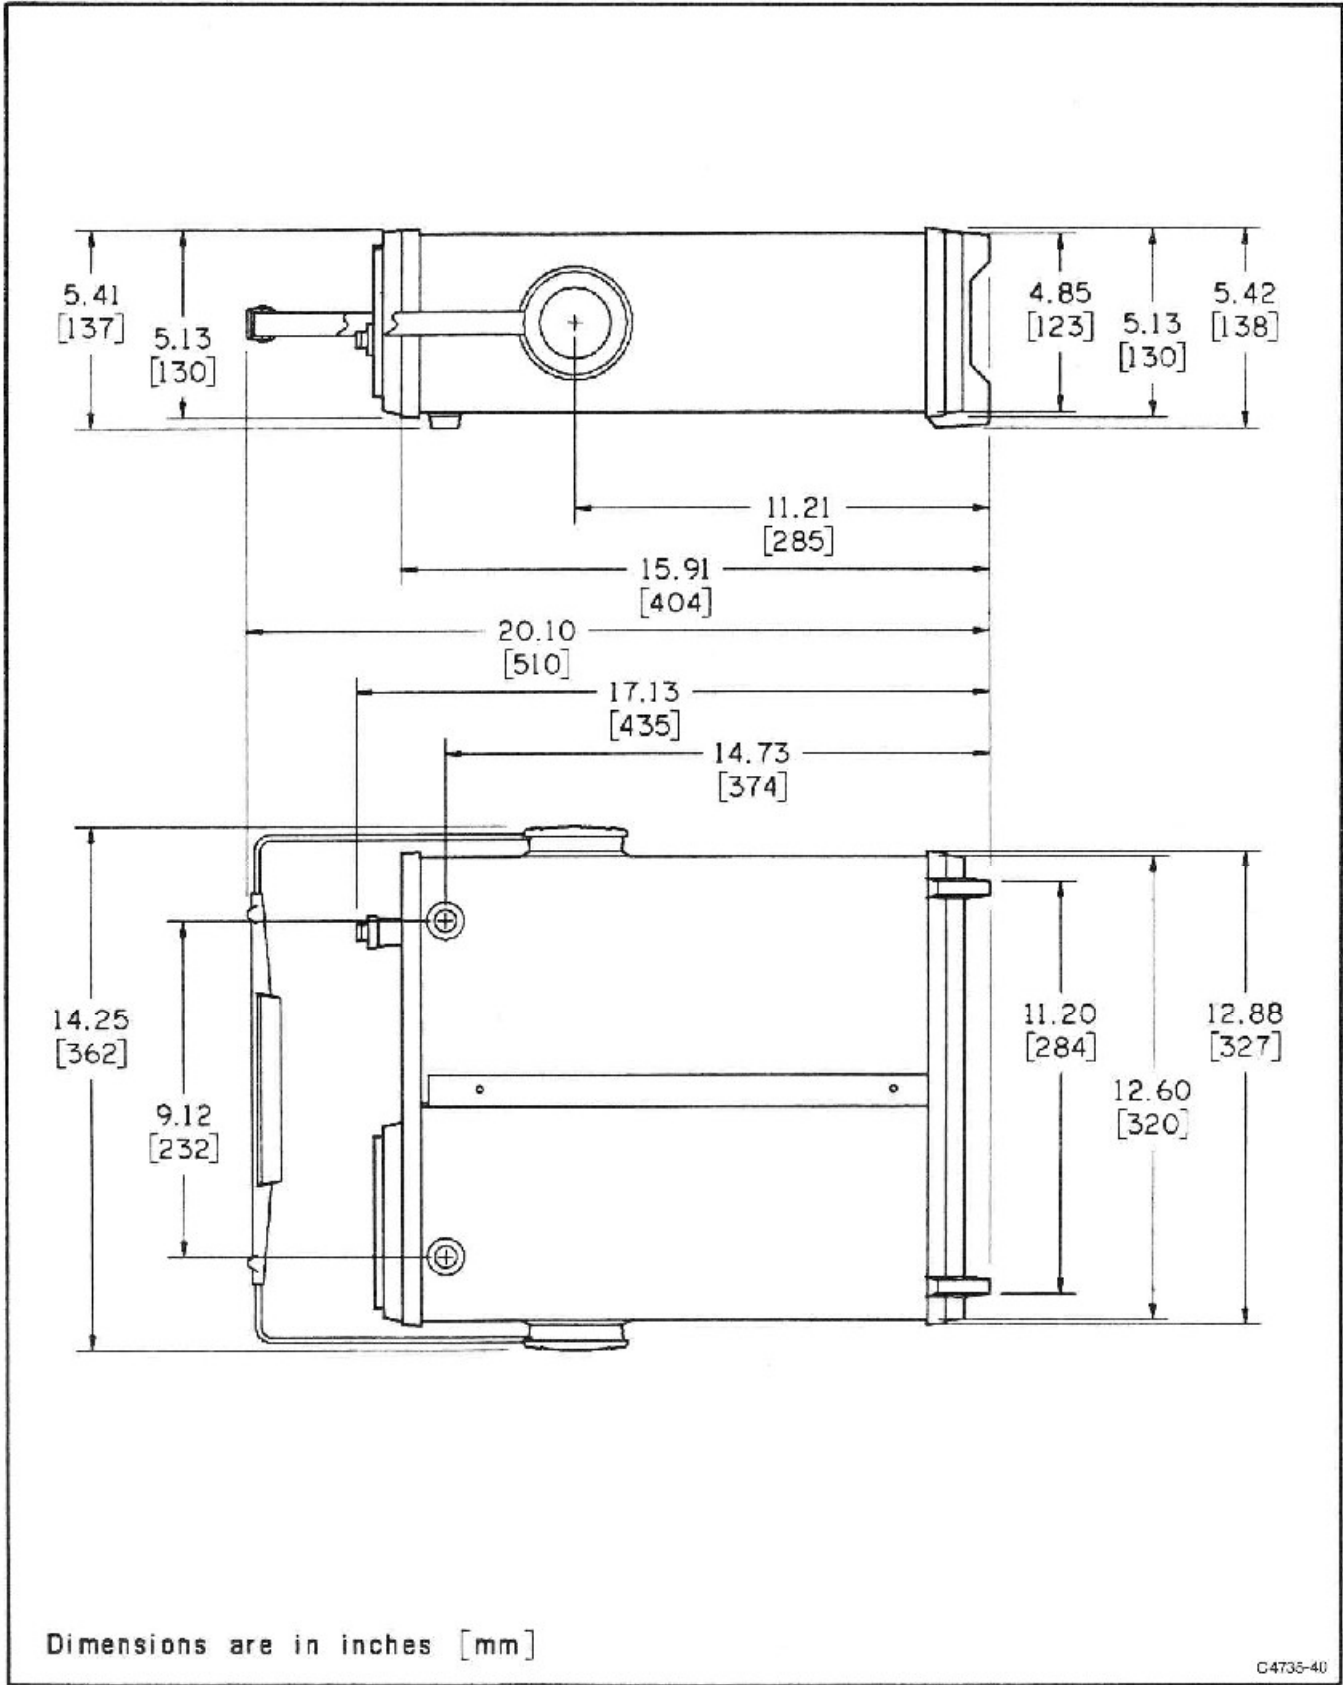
Physical dimensions of the 2213A Oscilloscope.
